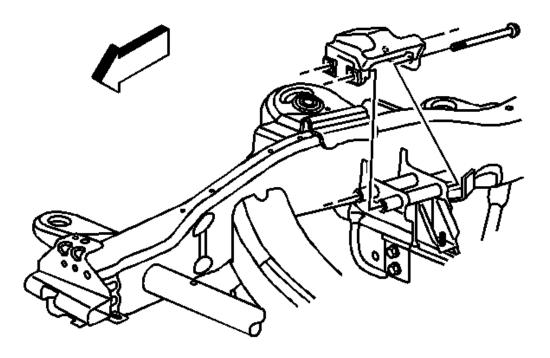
View Of Right Engine Mount Bracket Bolts Courtesy of GENERAL MOTORS CORP.
